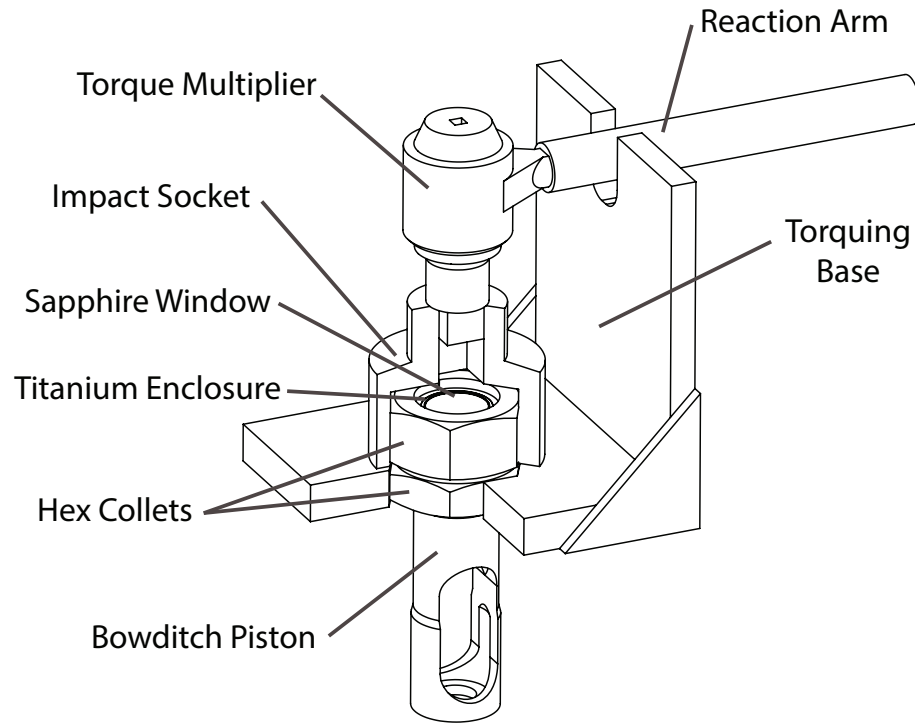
Torquing setup for window pre-load using torque multiplier. The cutaway in the impact socket and torque base show the hexagonal collets.
